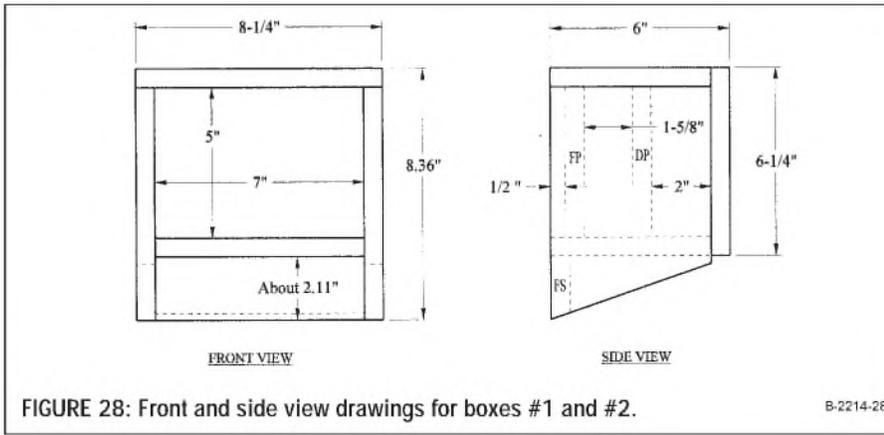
Front and side view drawings for boxes #1 and #2.
